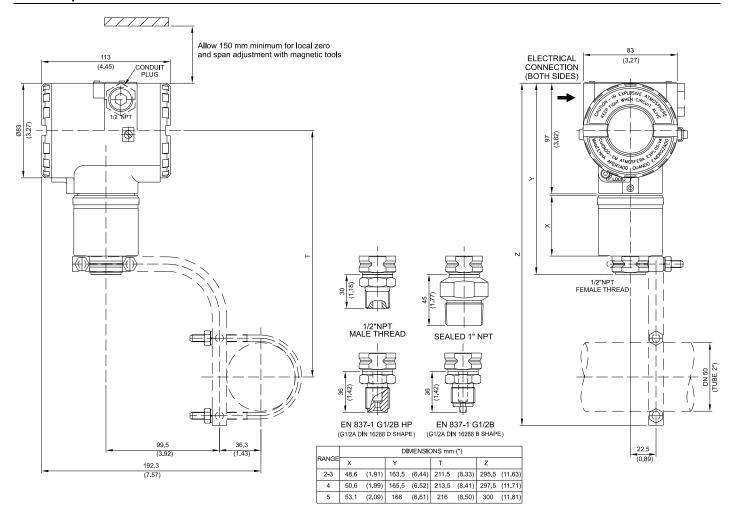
(a) - Dimensional Drawing and Mounting Position for LD293
